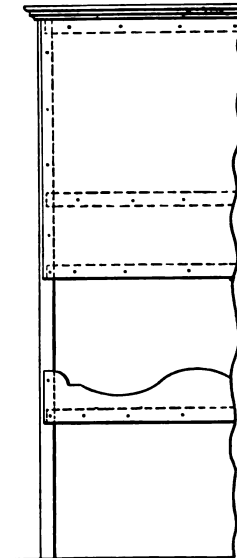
Partial Rear Elevation. Scale, 1 Inch to the Foot.
